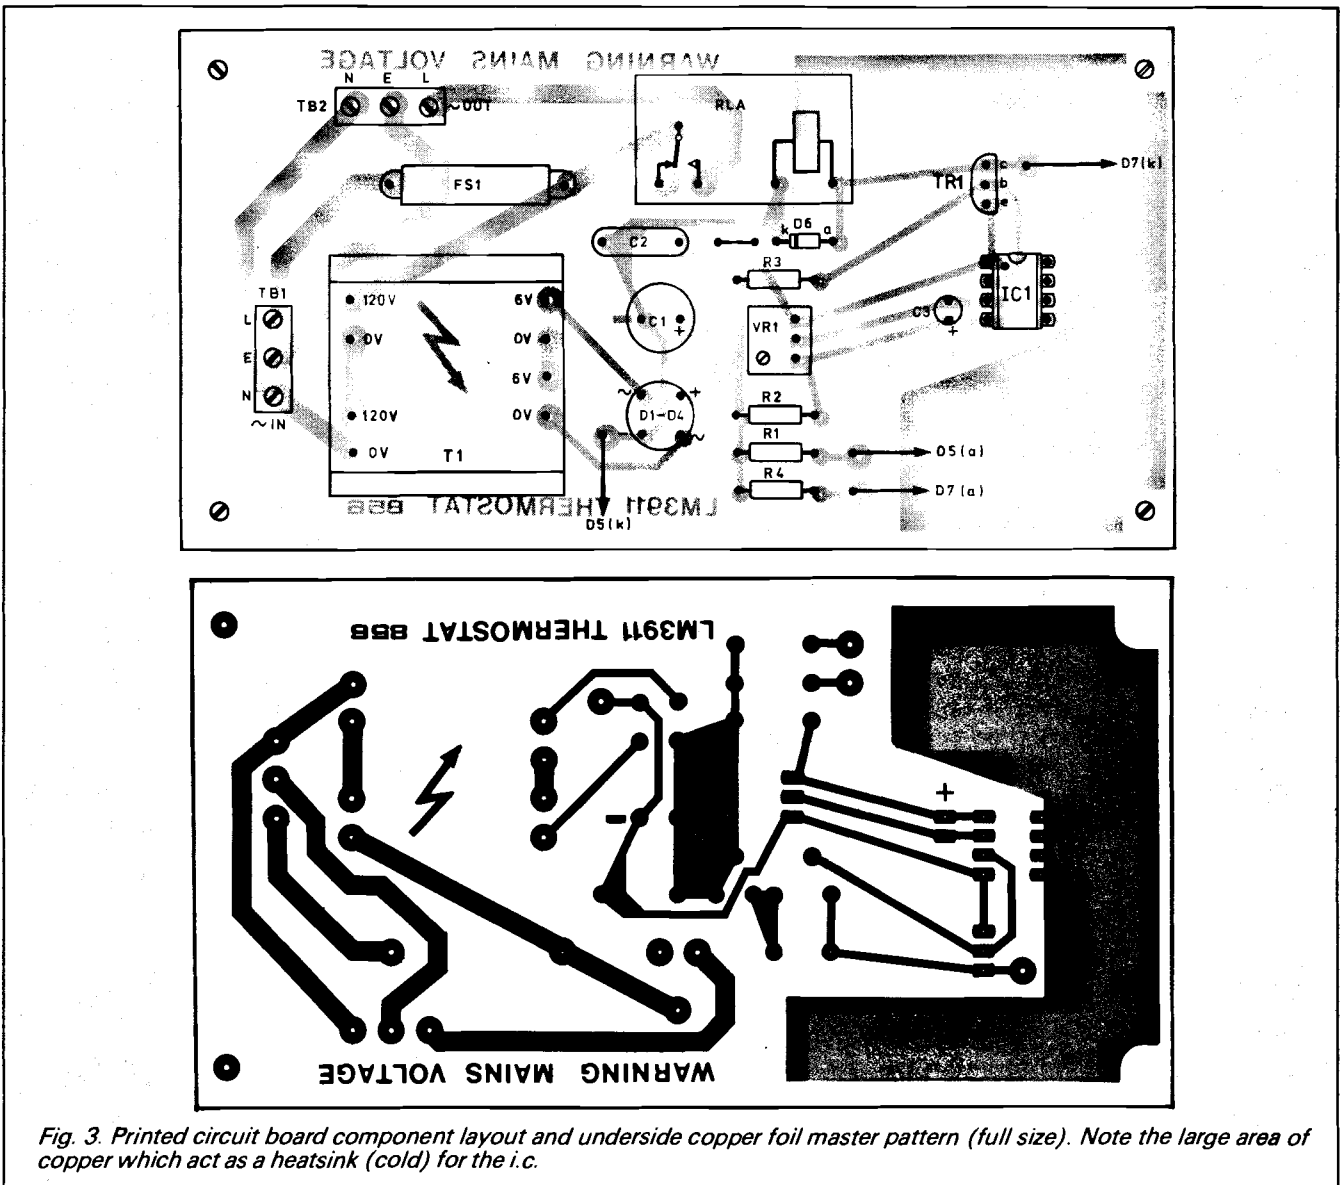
Printed circuit board component layout and underside copper foil master pattern (full size). Note the large area of copper which act as a heatsink (cold) for the i.c.
